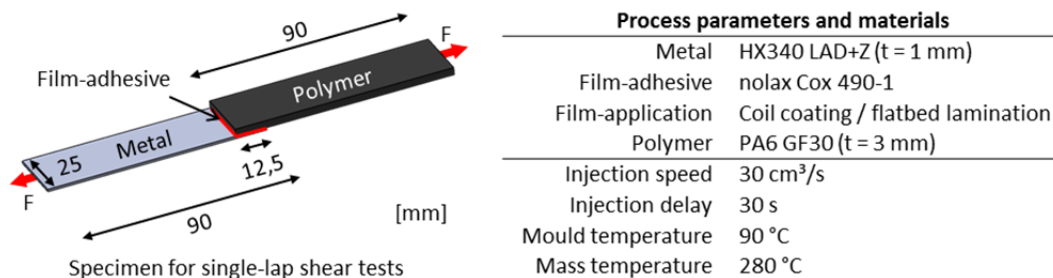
Injection moulded metal-polymer single-lap shear specimen for tensile test based on DIN EN 1465
